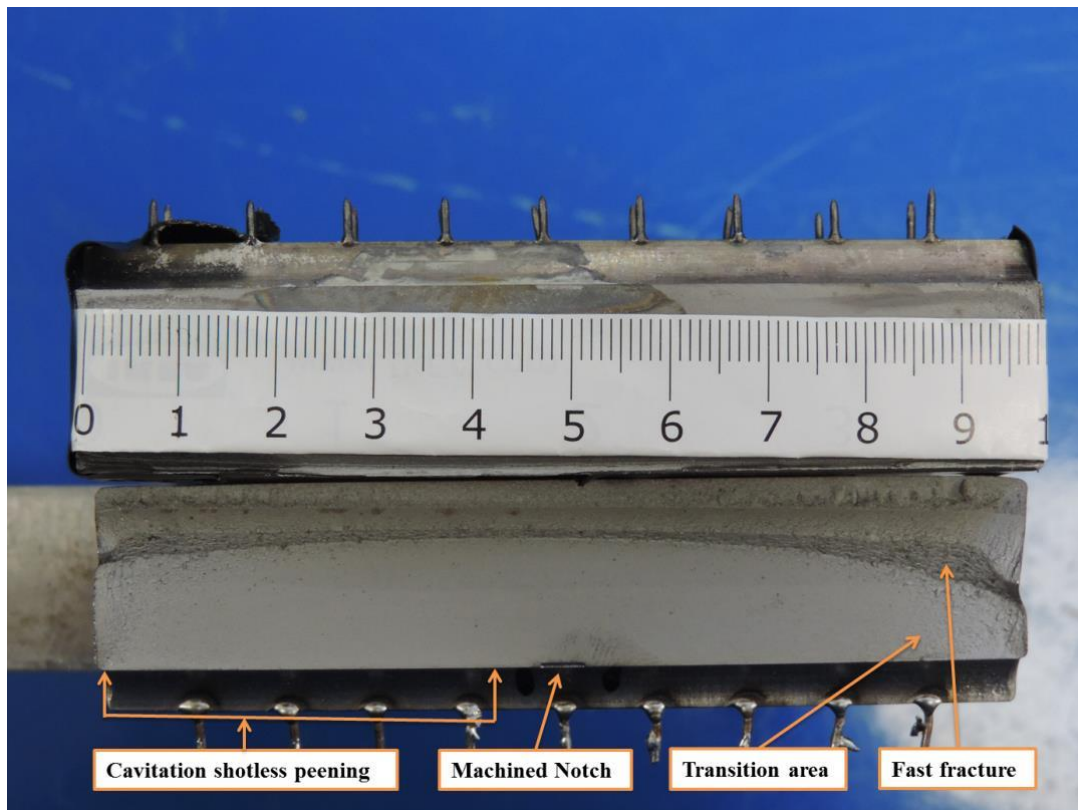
Fracture surface for A10-1 specimen
